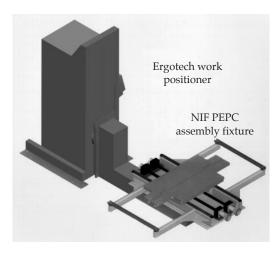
The PEPC assembly fixture will be used with an Ergotech motorized positioner to assemble PEPC LRUs in the Optical Assembly Building. (70-00-0299-0371pb01)
